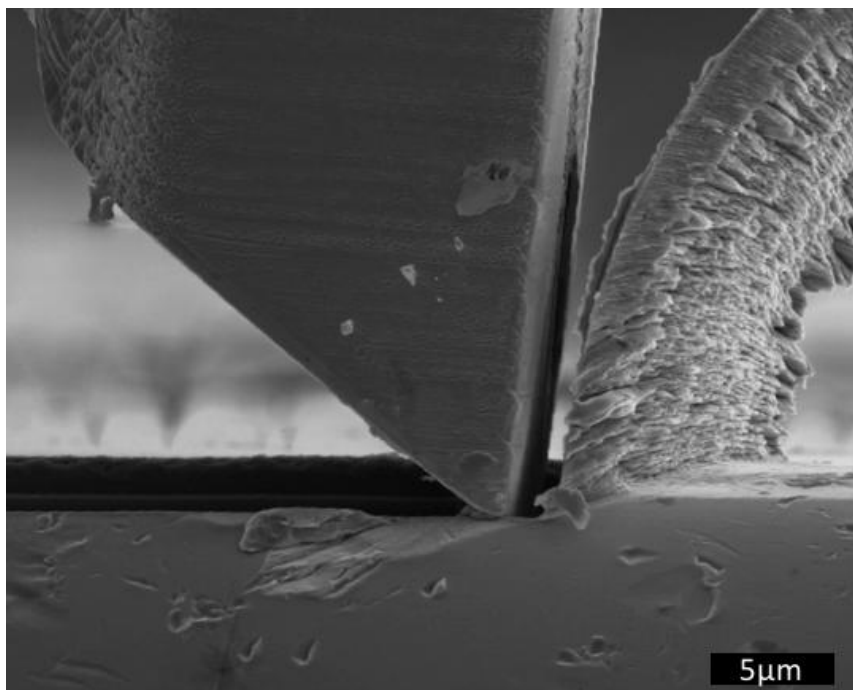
Lateral view of the system workpiece-chip-tool. It can be observed that chip appear in front of the tool in a similar manner as in macroscopic cutting.
